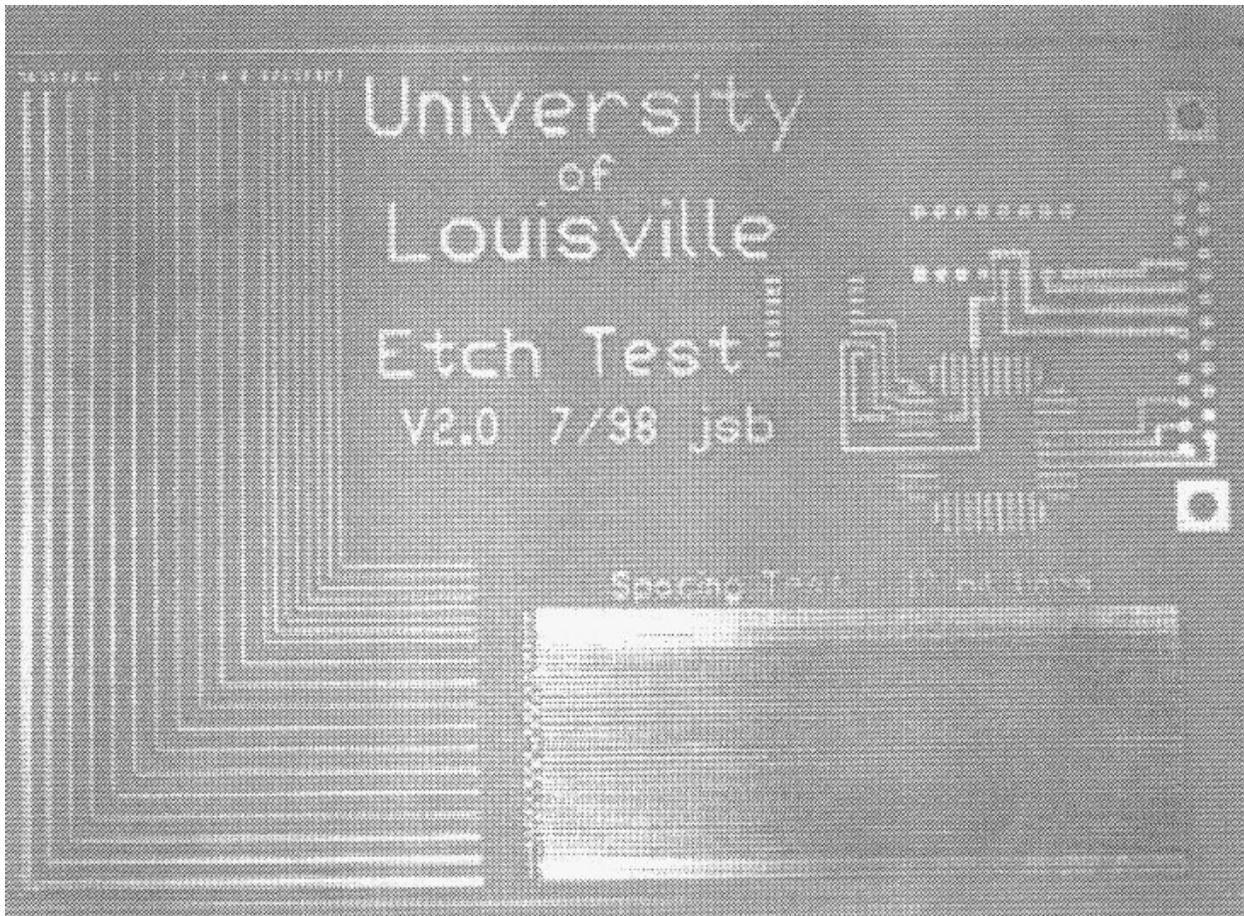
Test pattern PCB after copper etching and resist cleanup.
